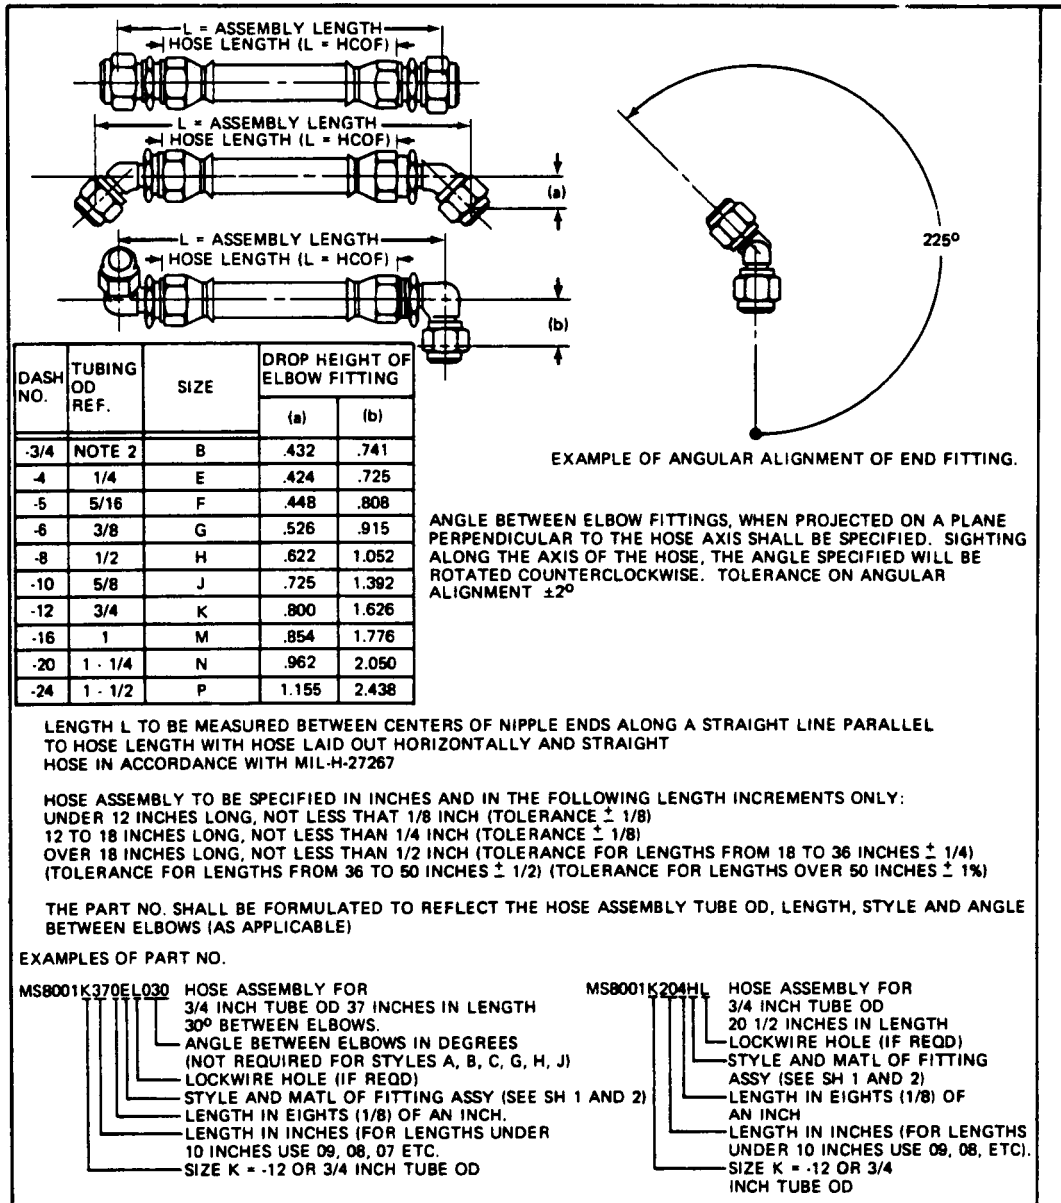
Hose Assembly MS8000 Series (Sheet 4 of 9)
